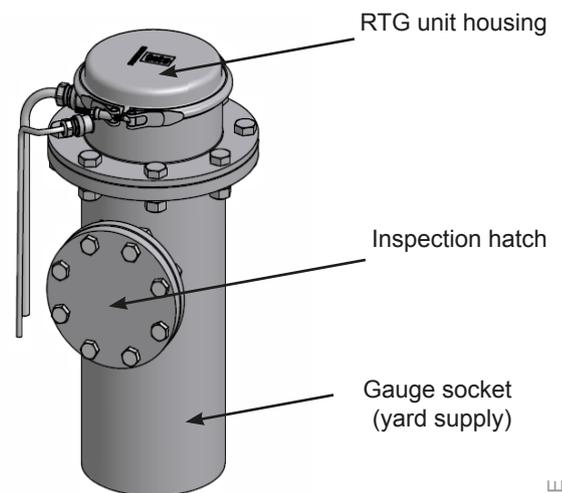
GLA-300/P on a Ø200 mm socket. Inspection hatch mounted on the gauge socket.
